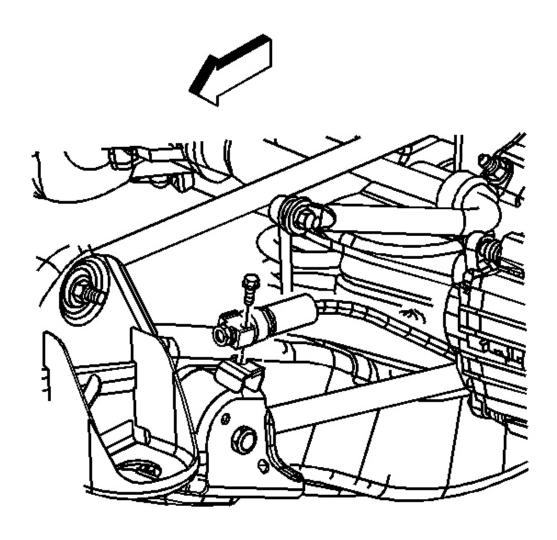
Removing/Installing Brake Line Retaining Bolt Courtesy of GENERAL MOTORS CORP.
